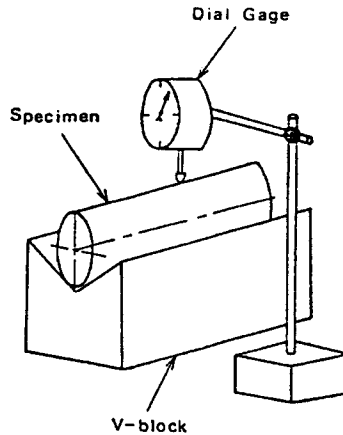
Assembly for Determining the Straightness of the Cylindrical Surface
